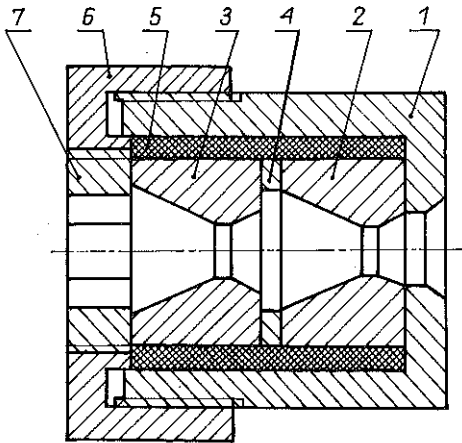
Lubricant hydrodynamic force feed drawing device [6]: 1 - housing, 2 - working die, 3 - force feed nozzle, 4 - sealing ring; 5 - clamping bush, 6 - flanged nut, 7 - hollow plug.
